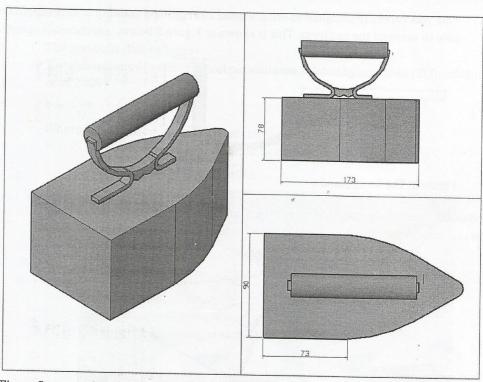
The Fabricated sad Iron (All dimensions in mm)
